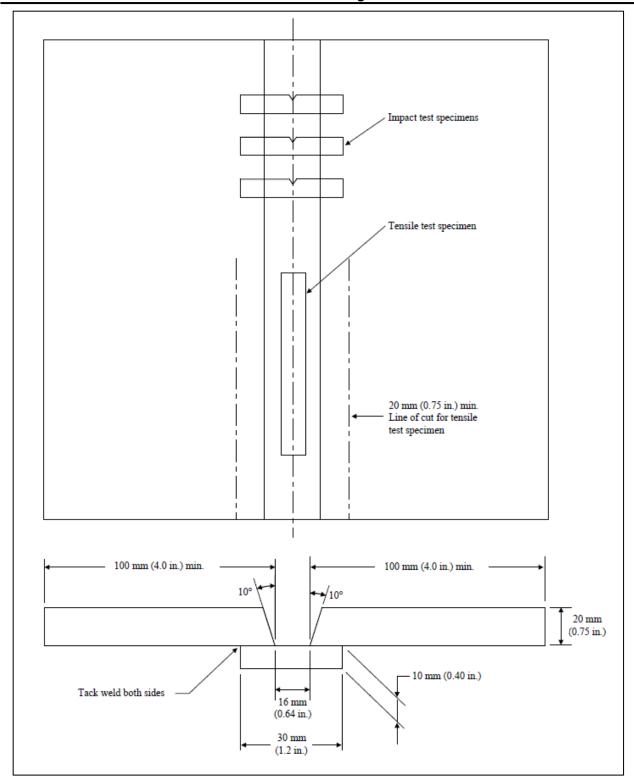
Deposited-Metal Test Assembly for Manual and Gas-Metal Arc Welding
